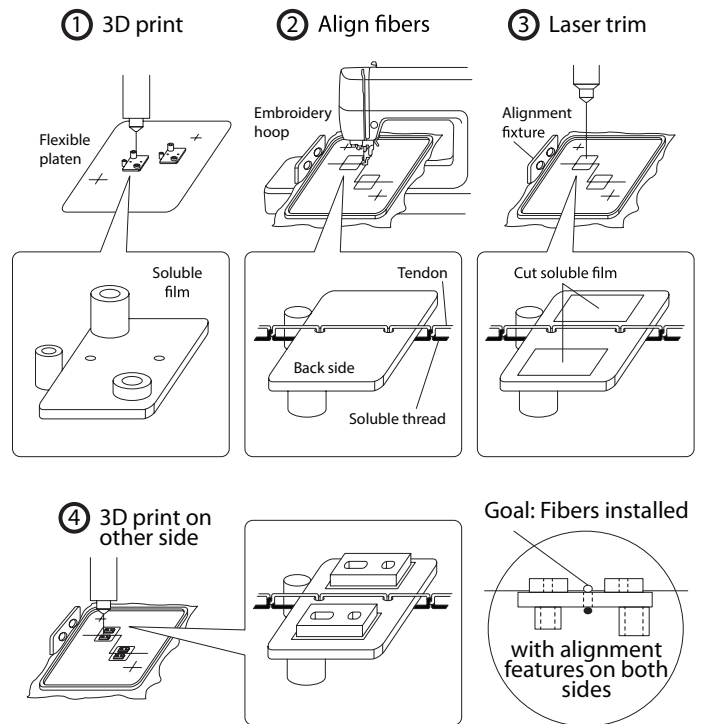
Process for using an embroidery machine (center column) to align fibers with 3D printed and laser-cut features. Printing starts on a water-soluble support film that holds parts in place during embroidery and subsequent processing.
